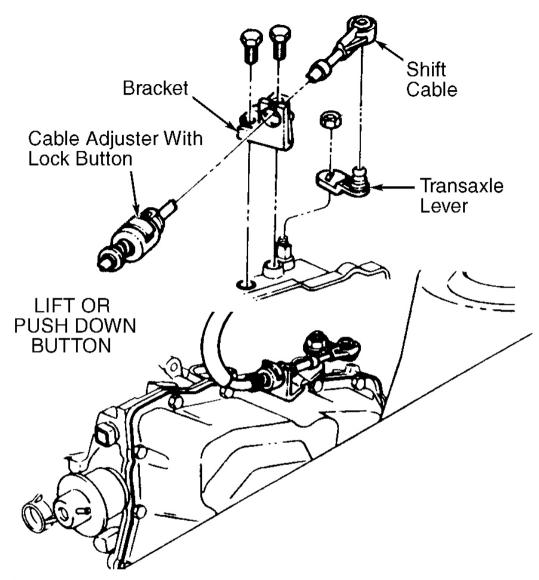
Adjusting Shift Cable ("J" & "N" Bodies) Courtesy of GENERAL MOTORS CORP.
